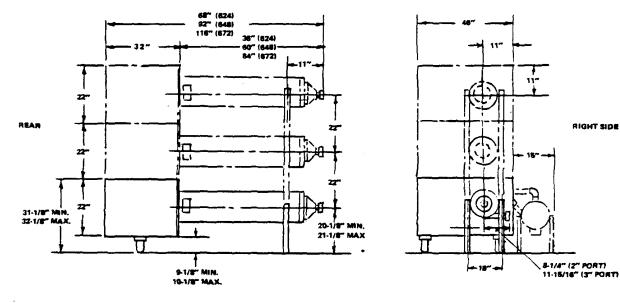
Dimensions - Model DE Thermutator with Style V Cabinet
